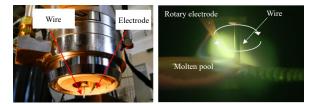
External view and metal stacking situation of rotary TIG welding torch
